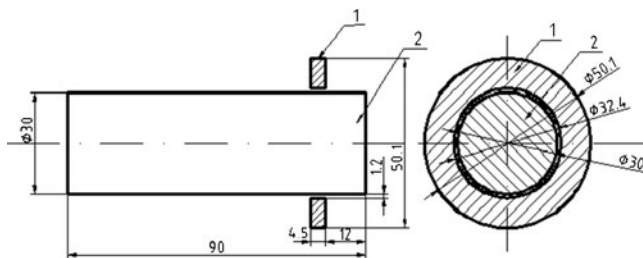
Dimensions of the T3 Cu annular block and the 35CrMnSi steel shaft (1, T3; 2, 35CrMnSi; in millimeters)
